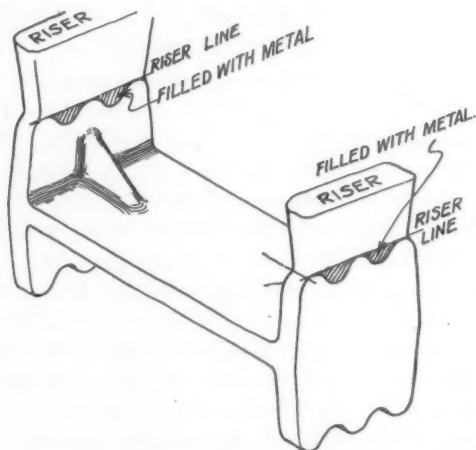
CASTING ILLUSTRATING HOW CURVED SURFACES REQUIRING RISERS MAY BE REDESIGNED TO GIVE SMOOTH SURFACES WHICH PERMIT ECONOMIES IN REMOVING RISERS.
